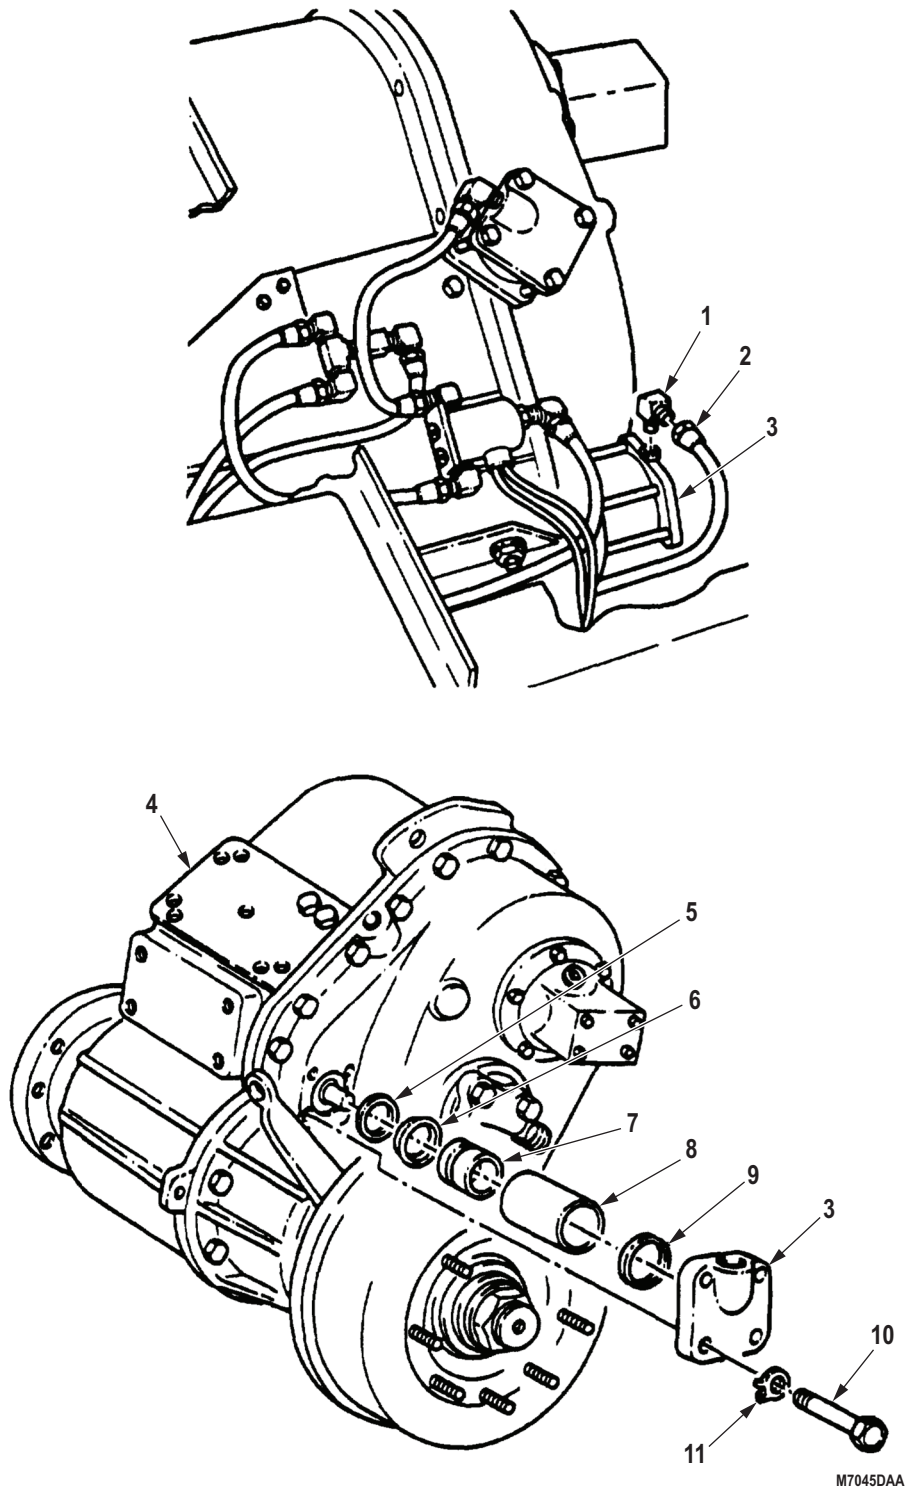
Transfer Case Front Axle Engagement Air Cylinder Removal.
